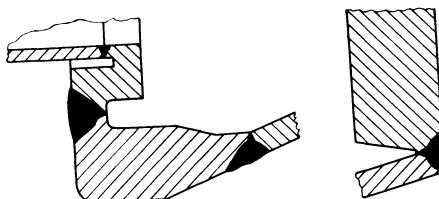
Butt welds used on large vacuum vessels of special shapes. After Mark⁸⁰⁴
